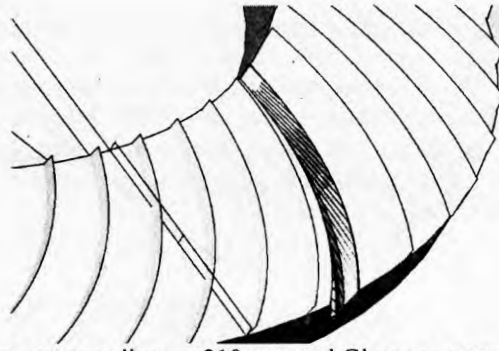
Klingelnberg cutter radius $r = 210$ mm and Gleason cutter diameter 18" (420.0 mm)
